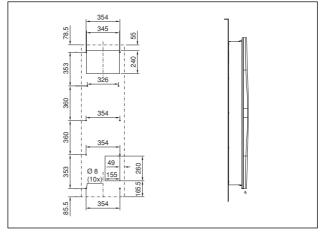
SK 3366.xxx/SK 3377.xxx external mounting
